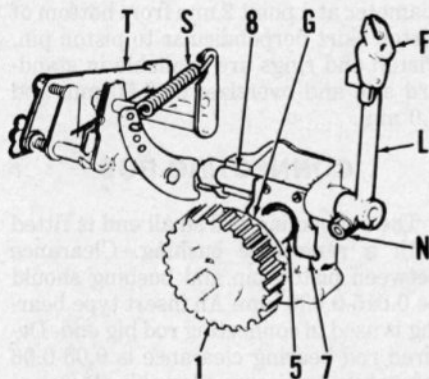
View of governor mechanism. Refer to text for operation.
